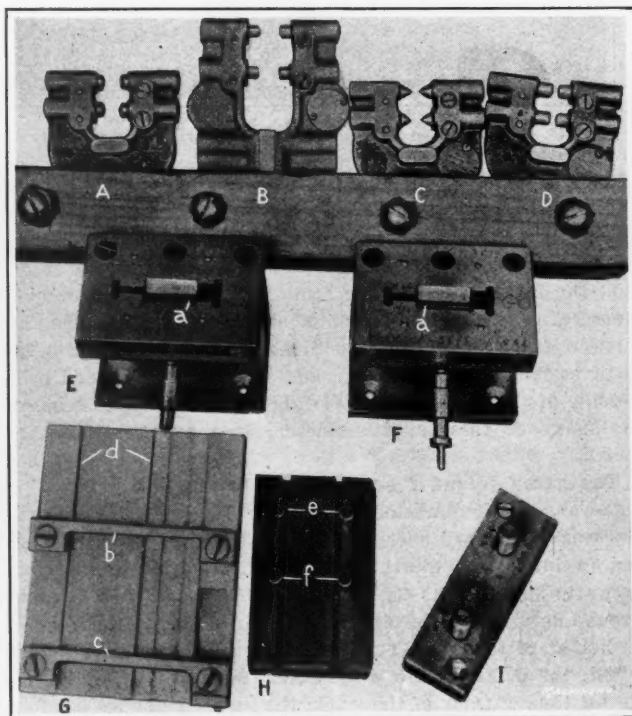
Gages employed for checking Accuracy of Firing Pin and Head
